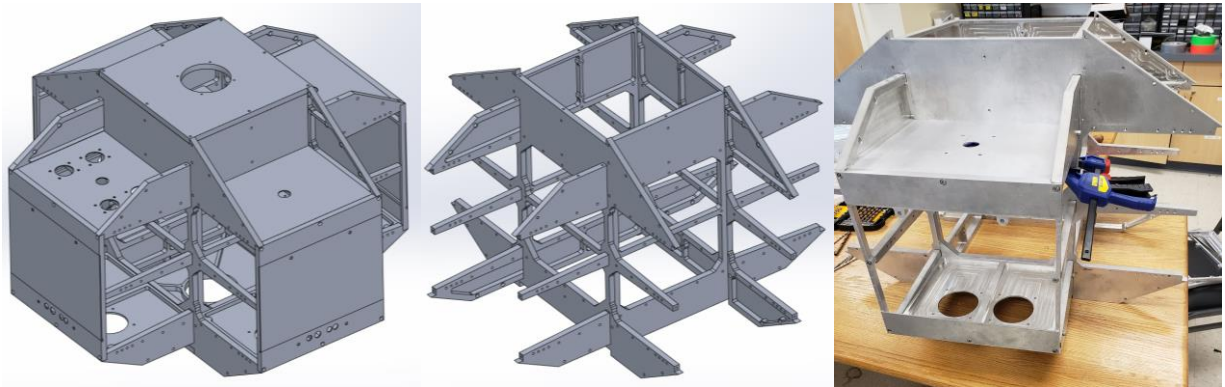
Body Assembly CAD (Left), Central Frame CAD (Middle), and First Frame Assembly (Right) by Dylan Reynolds
